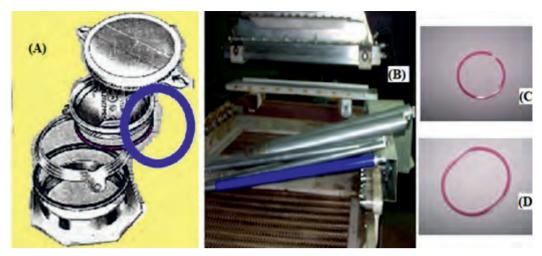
EB crosslinking of O-rings (A) O-ring use (B) Multi-spindle under-beam irradiation (C) Un-crosslinked O-rings (D) Crosslinked O-rings
